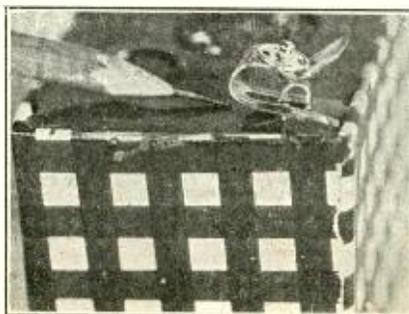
, drilling the hard rubber strip. Fig. 5, showing one way of providing ready removability. Here the lug is attached to the ring of the catch, the collar-button base of the catch being soldered to the end of a screw already inserted in the drillhole of the strip.
